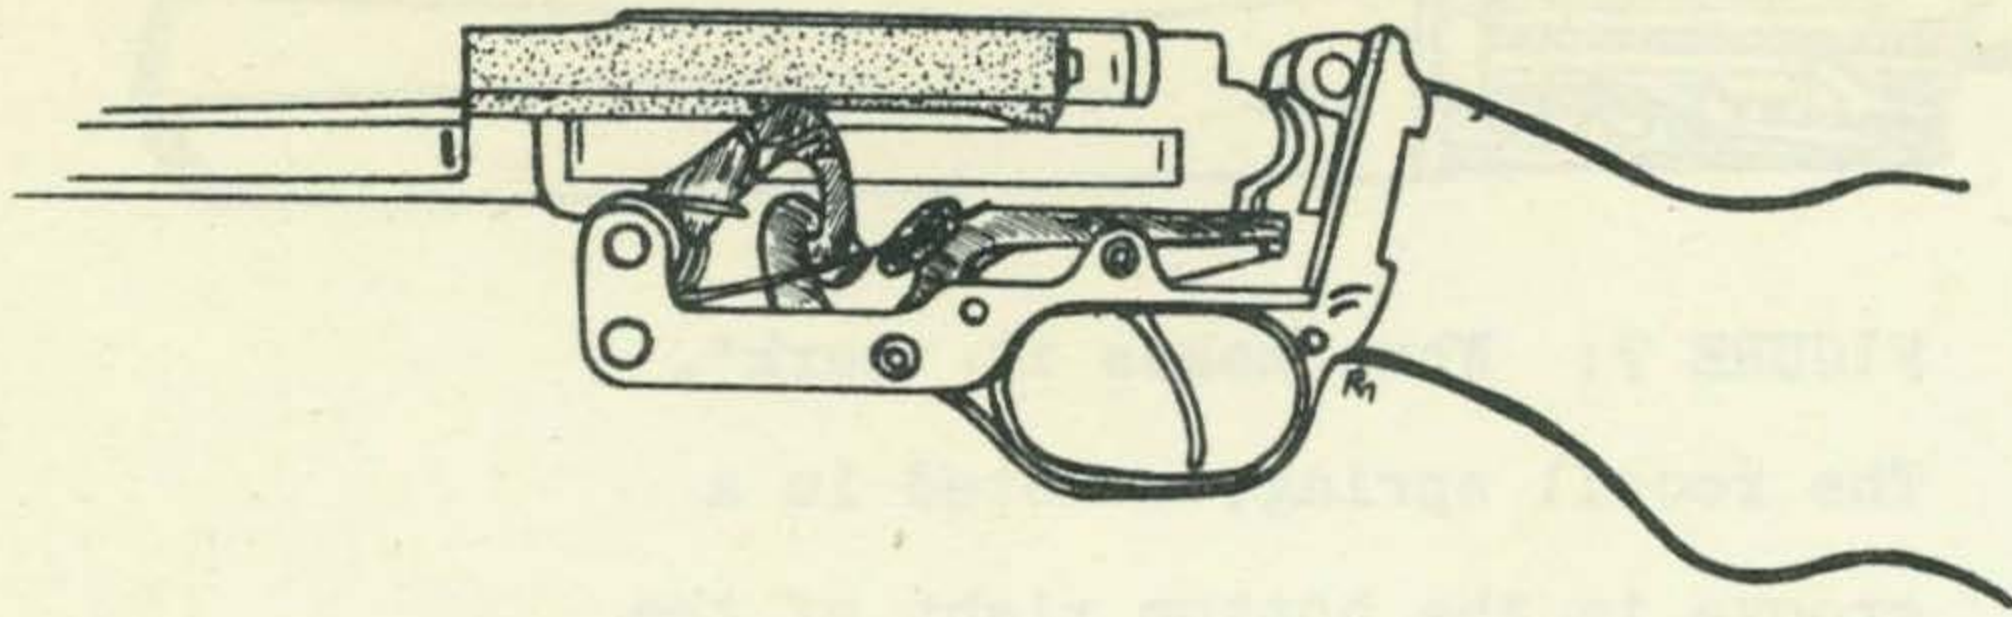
How the "bolt-catch" works. The Czechs, by making the hammer do the work of a catch have eliminated several parts from the gun. When the hammer is held by the front sear hook, the trigger entirely released, the nose of the hammer rises high enough to engage a semi-circular cut in the bottom of the bolt (shaded), holding it to the rear. Therefore, when you have fired the last shot, the magazine follower rises and blocks the bolt, and you naturally release the trigger to change magazines, thereby allowing the hammer to catch the bolt. After inserting a new magazine, you simply pull
